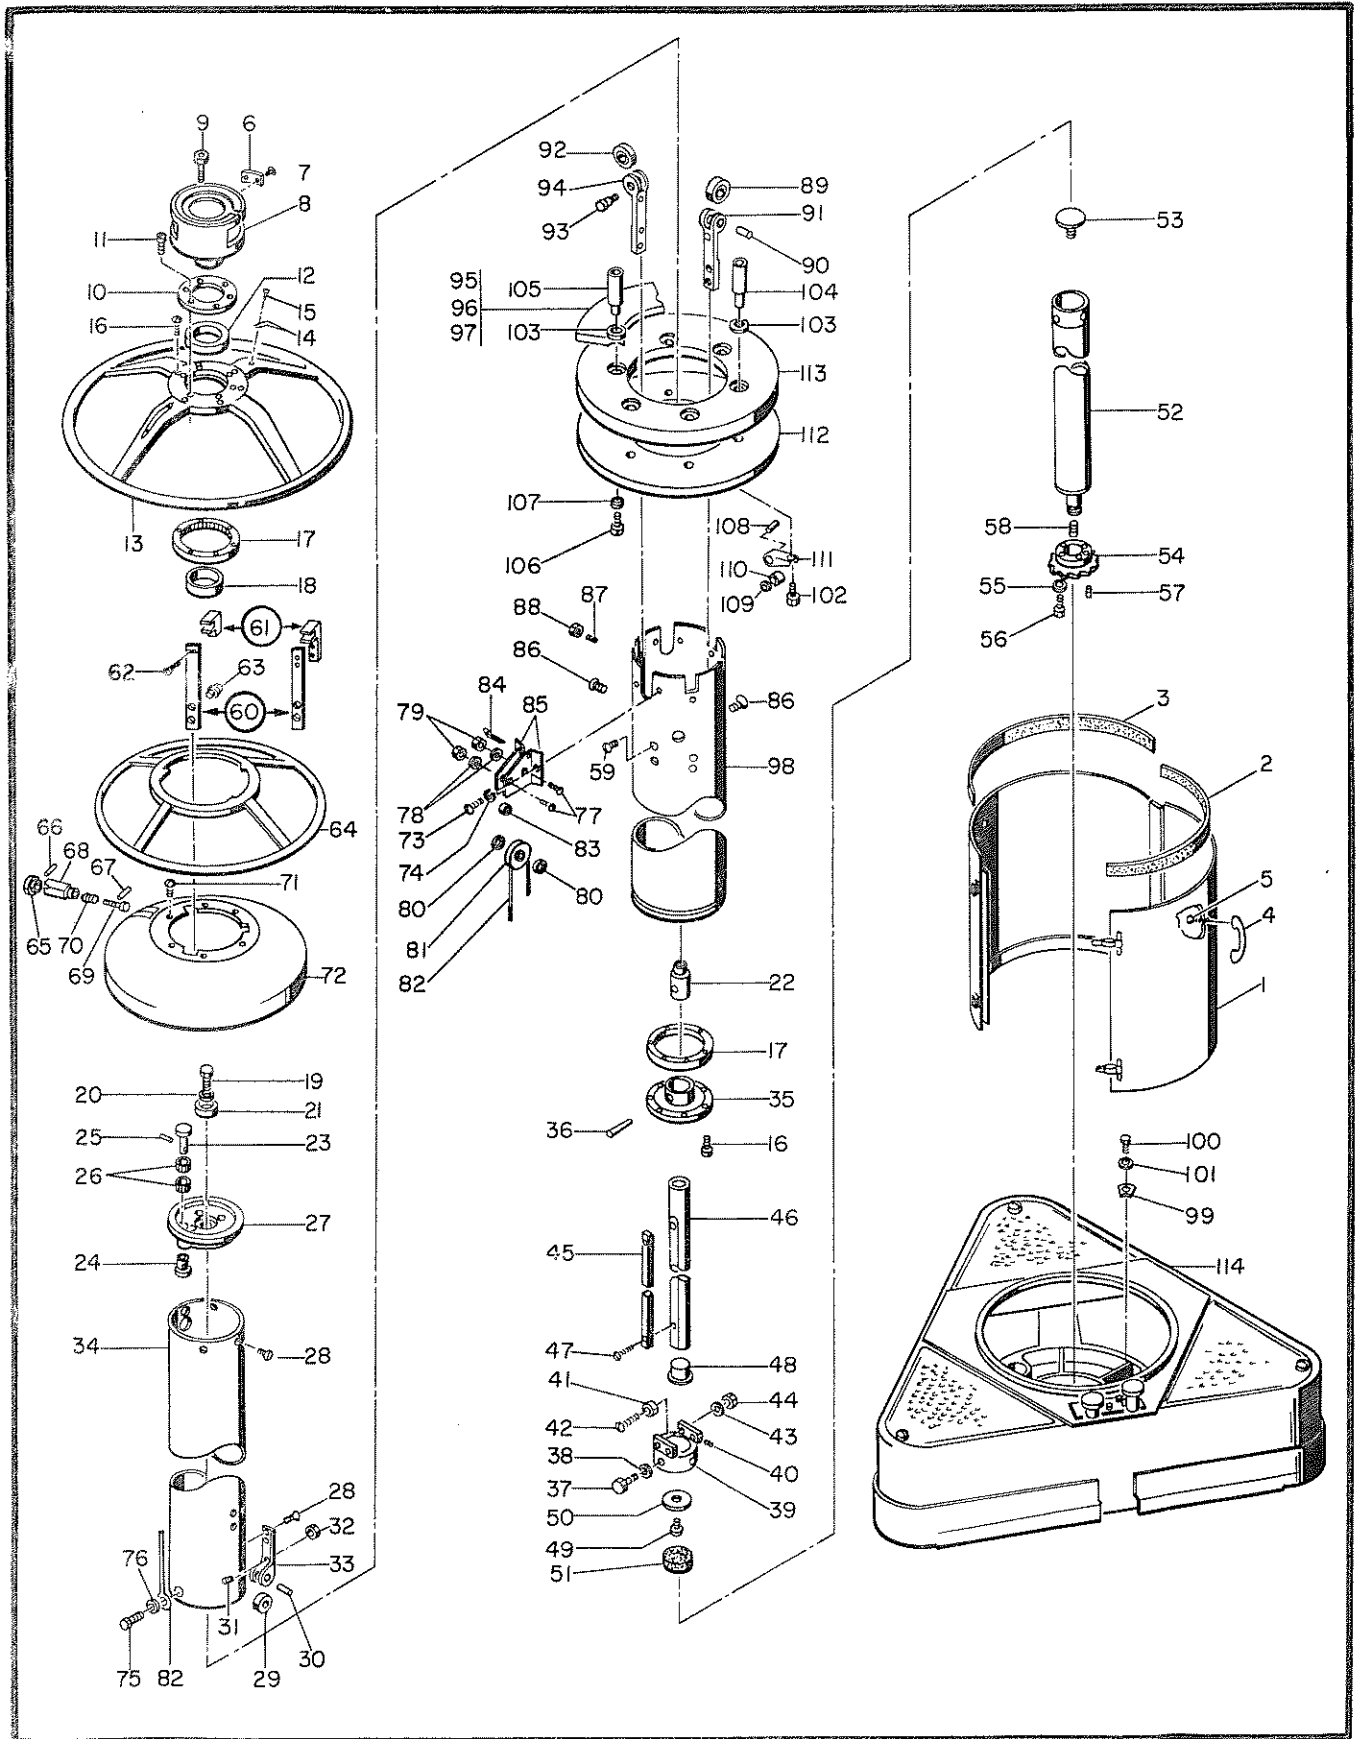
FIGURE I. HOUSTON-FEARLESS TYPE PD-3 TELEVISION PEDESTAL, EXPLODED VIEW, UPPER SECTION
